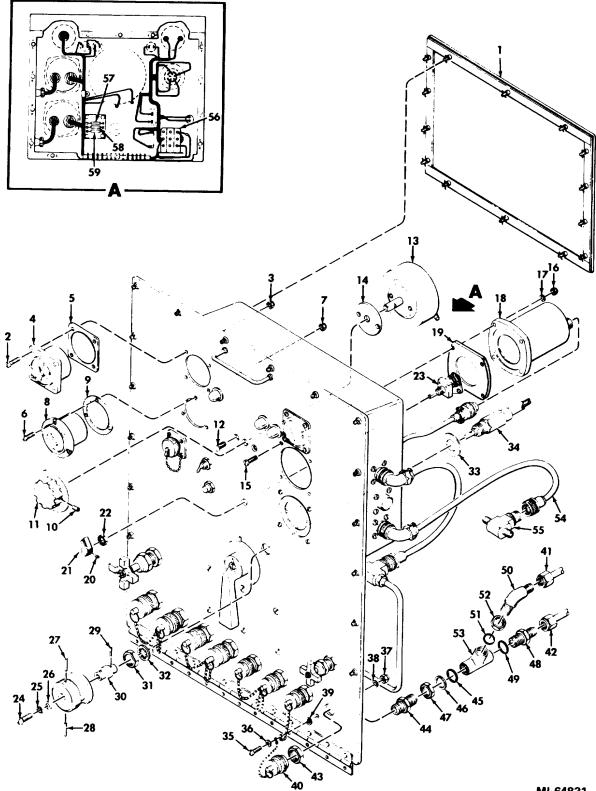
Components of the hydraulic test console upper left control panel-partial exploded view.
